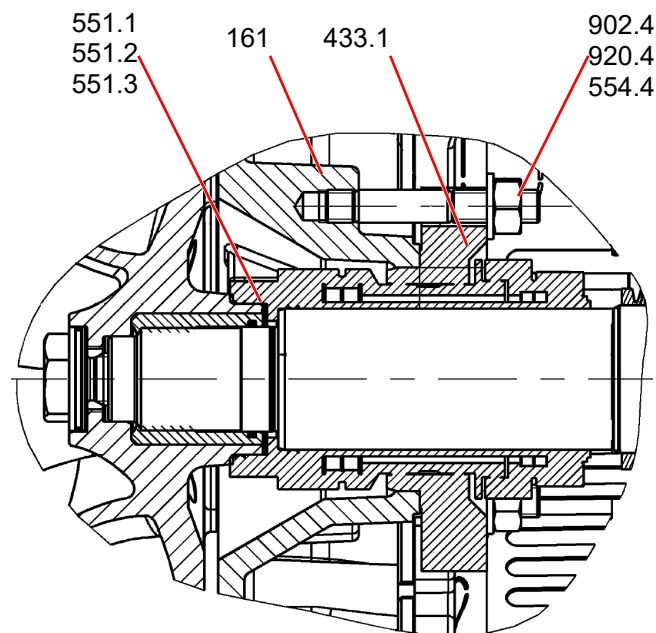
ANDRITZ – Cartridge seal BS24 – BS32
